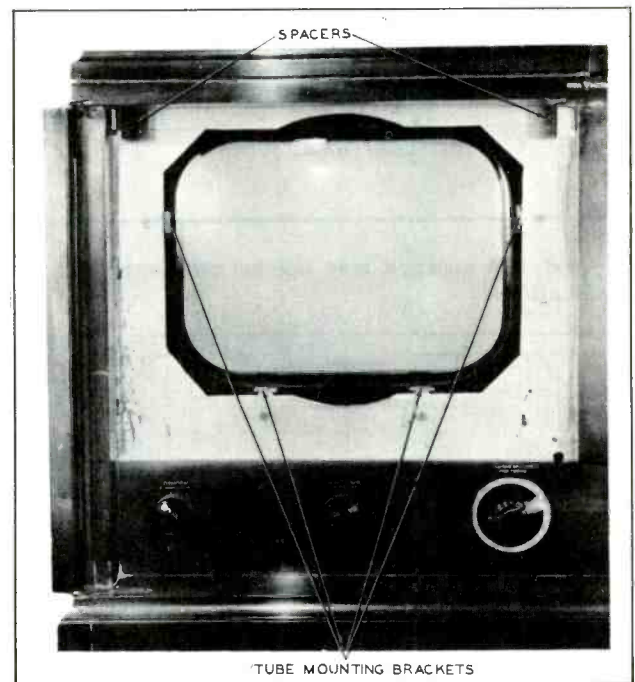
Sub-Panel Cutout and Tube Mounting Arrangement.
